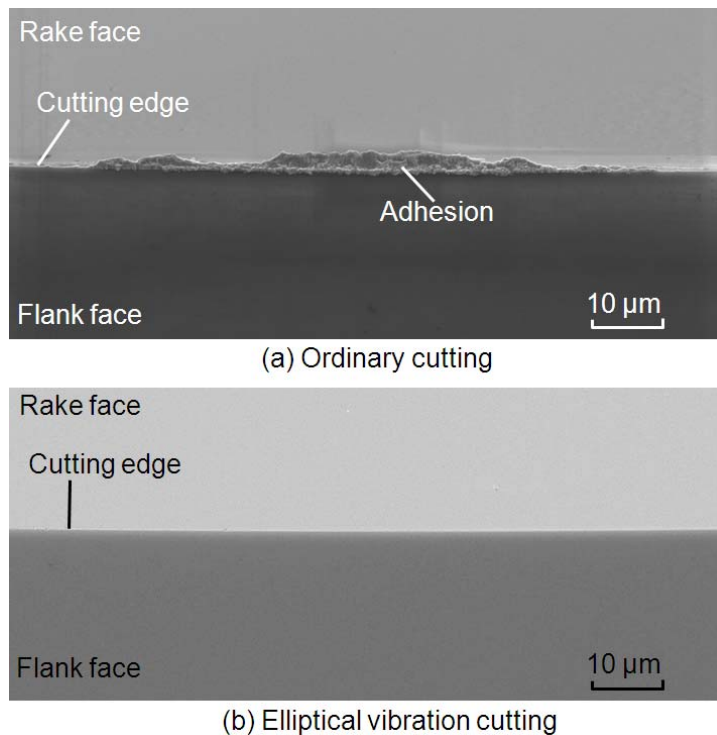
Cutting edges after grooving (workpiece: Co1)
